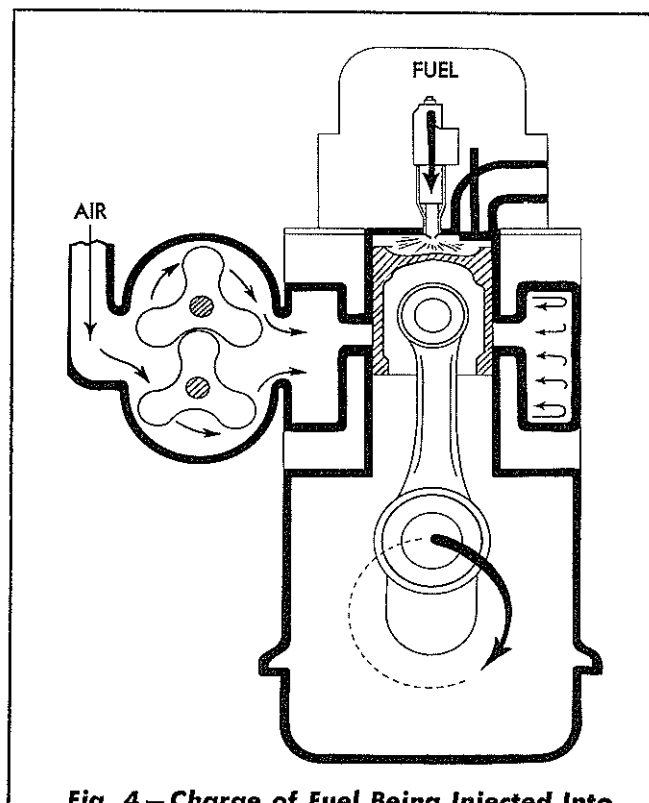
Charge of Fuel Being Injected Into Combustion Chamber
